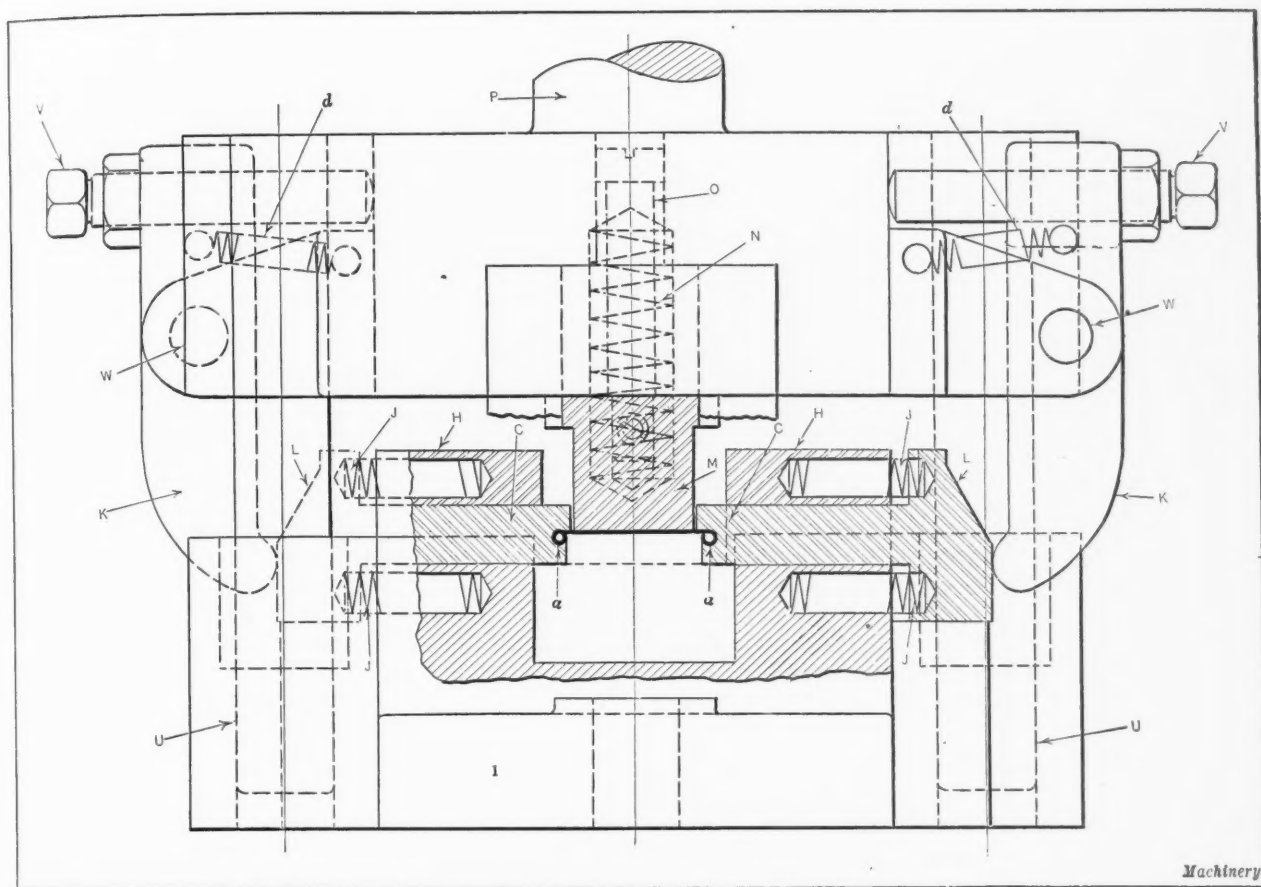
End Elevation, Showing Section of Side-forming Punches
